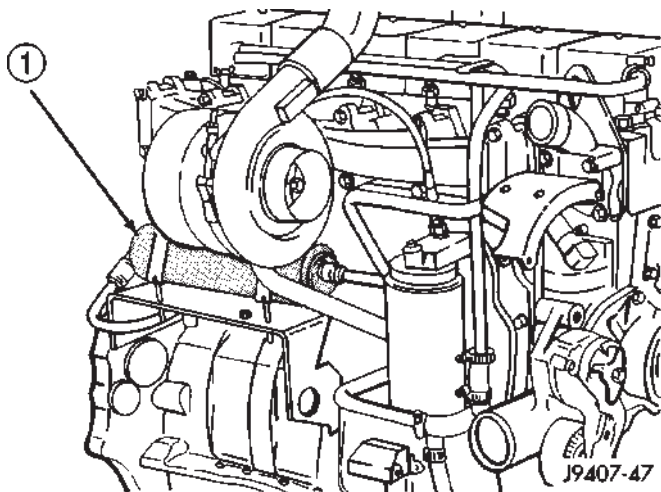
Transmission Water-To- Oil Cooler—Diesel
